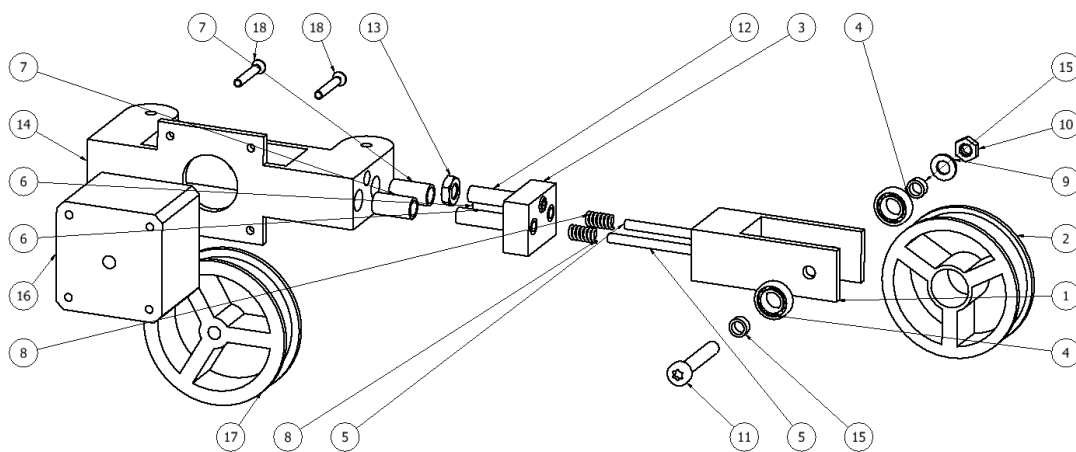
Schematic of the sound generating mechanism: 1 - fork, 2 - tension roller, 3 - belt tension adjuster, 4 - ball bearing, 5 - rod, 6 - stabilizing sleeve I, 7 - stabilizing sleeve II, 8 - spring, 9 - washer, 10 - M5 nut, 11 - M5 screw, 12 - M6 threaded pin, 13 - M6 nut, 14 - body, 15 - stabilizing sleeve III, 16 - stepper motor, 17 - drive wheel, 18 - M3 screw.
